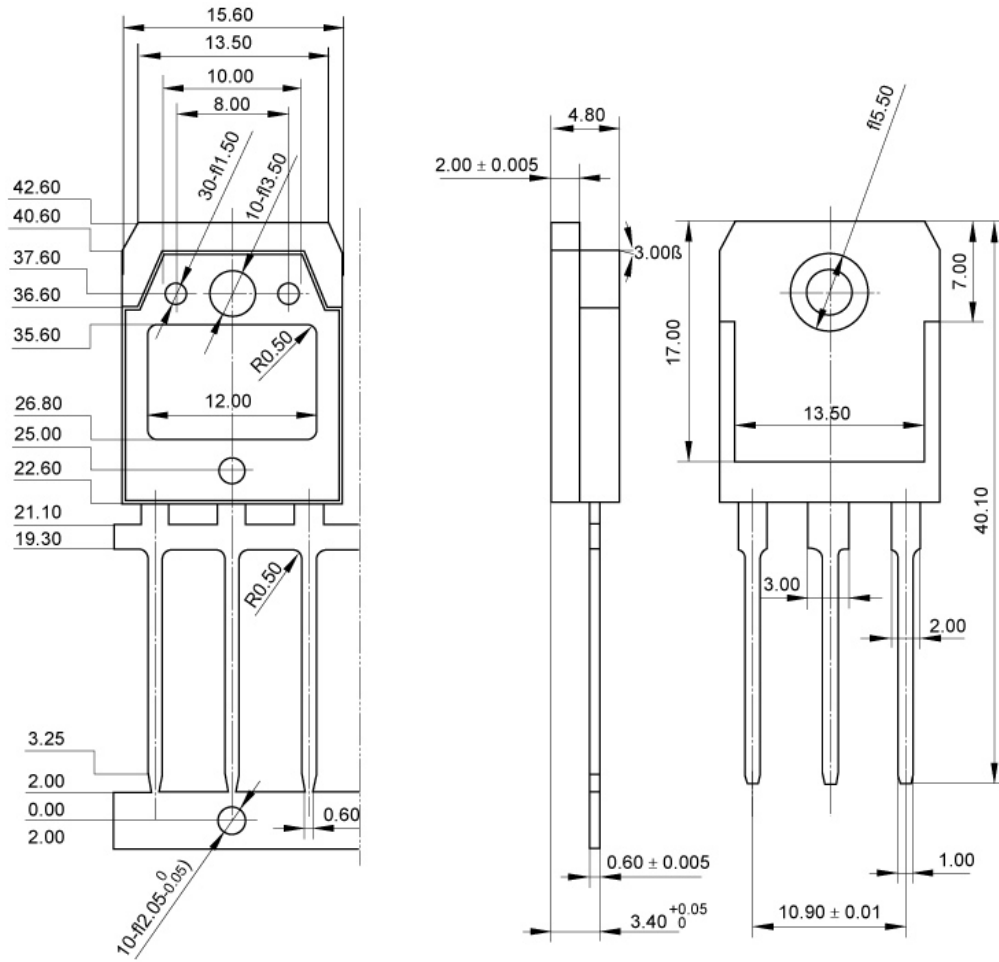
outline dimensions (unindicated tolerance:±0.1mm)
